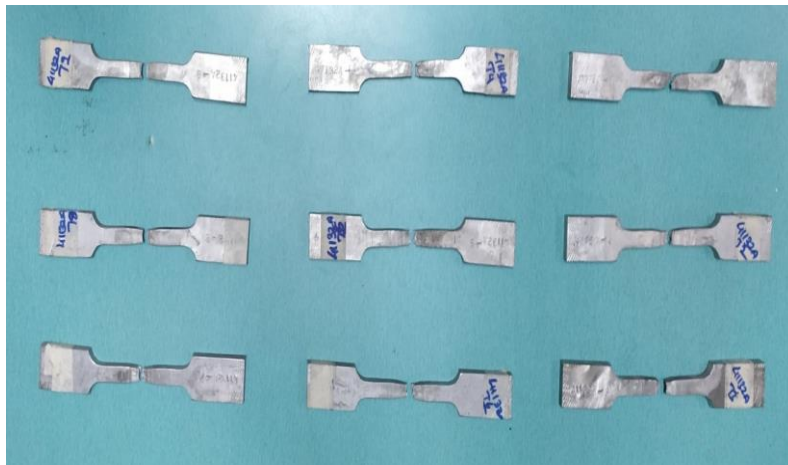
Photograph of Tensile Fractured Weldment made by TIG.
